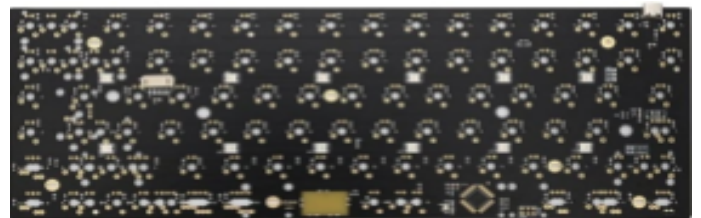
Printed Circuit Board (PCBONLINE, 2021)
